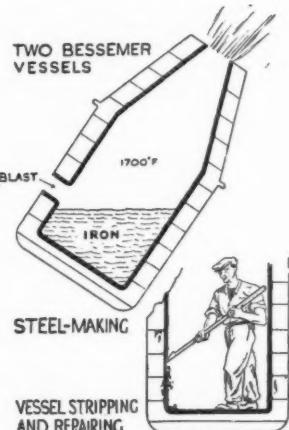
STEEL-MAKING IN BESSEMER VESSELS (TROPENAS)
